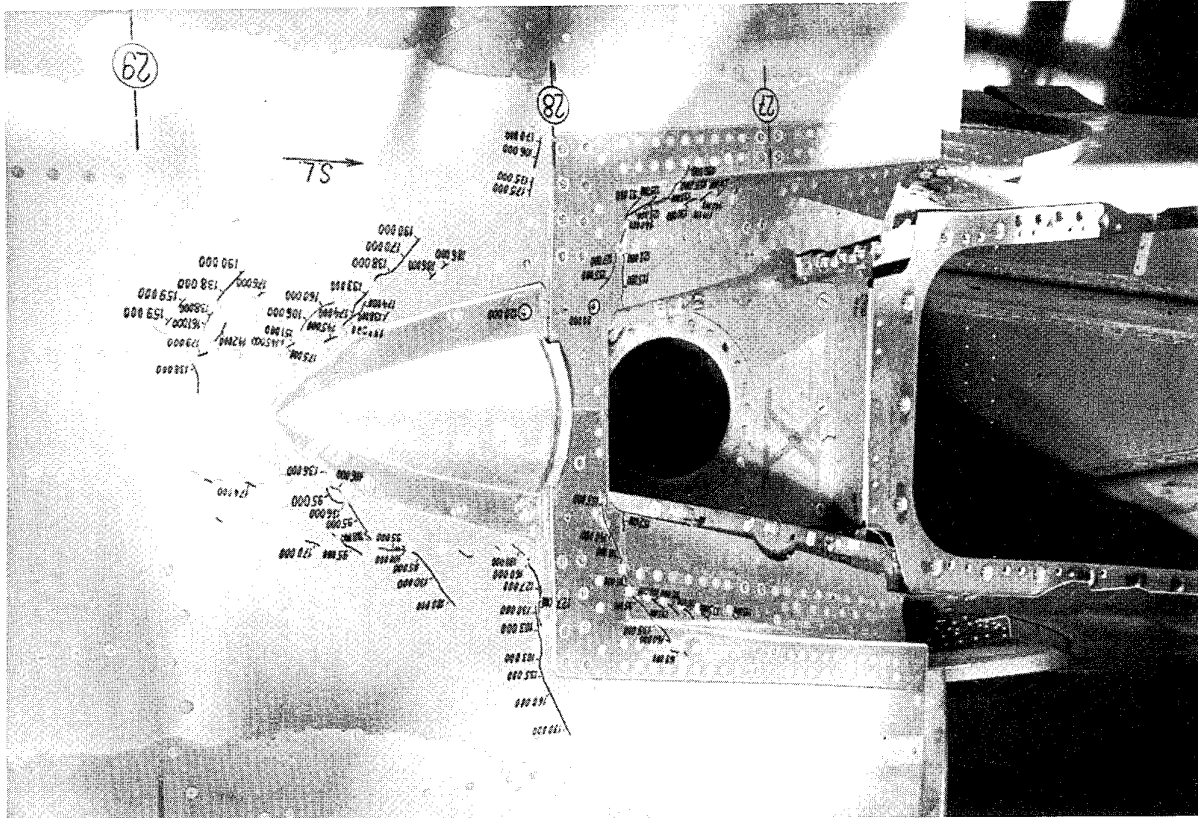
Fatigue cracks on fuselage upper panel after the test
